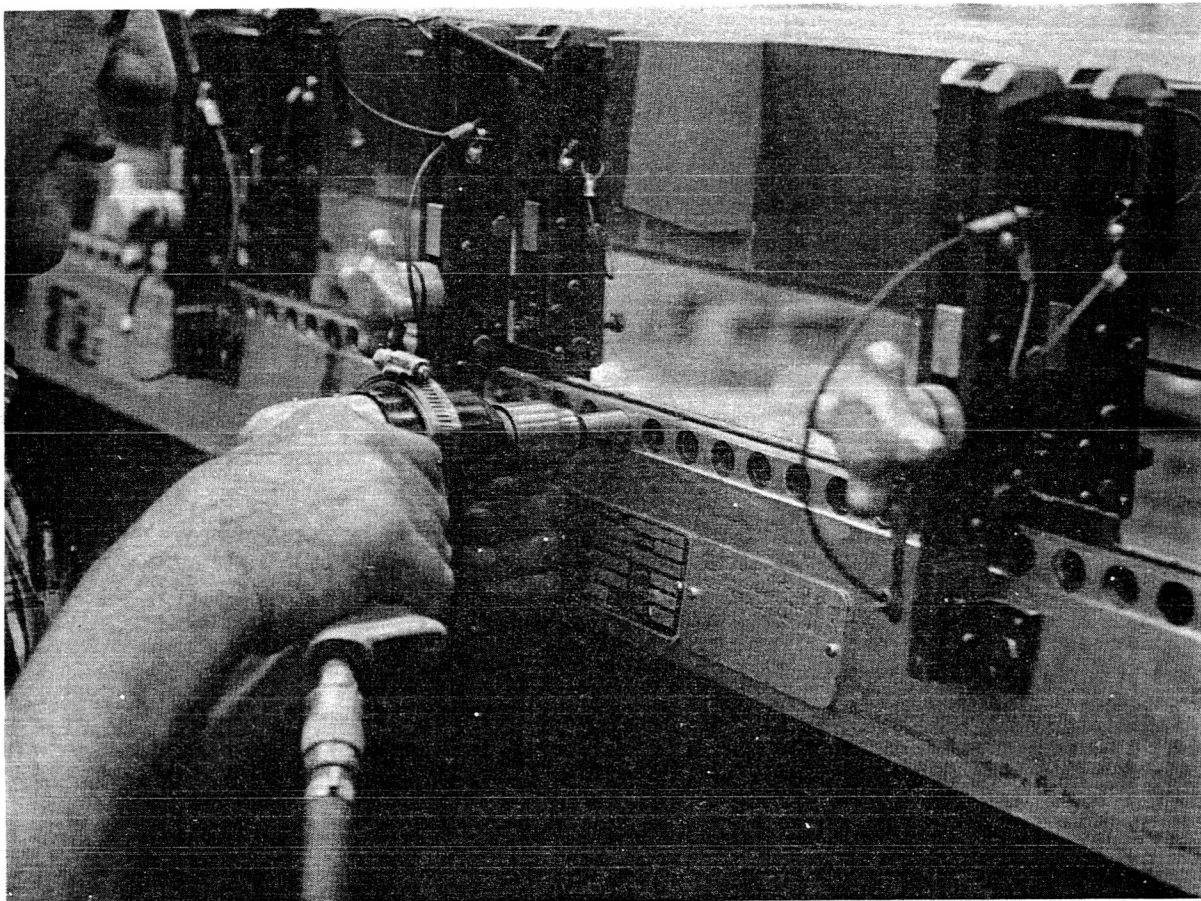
Drilling Operation Using Index Holes Sized to Vacuum Nozzle
